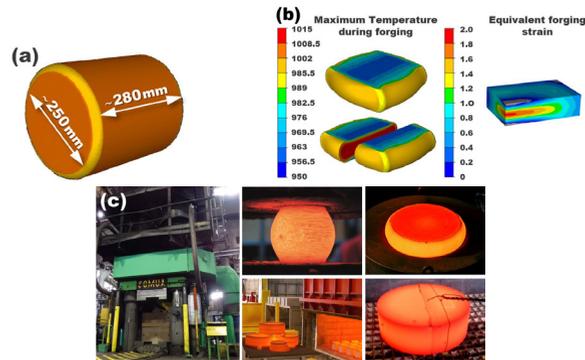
Process for selection of TMP routes, forging modes, and manufacturing parameters: (a) typical dimensions of initial billet sections, (b) thermo-mechanical simulations of forging of pancakes, and (c) illustration of the 22 000 kN hydraulic press used to perform forging operations, courtesy of Aubert & Duval, Pamiers.
